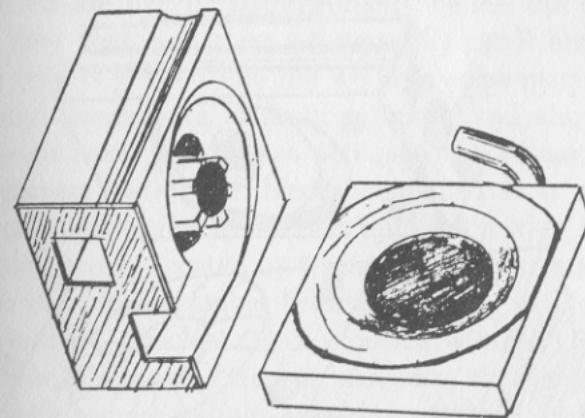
A Unit-block Broken Apart to Show the Pouch. This is of the "upright" Type, with the Pouch Underneath the Valve.
